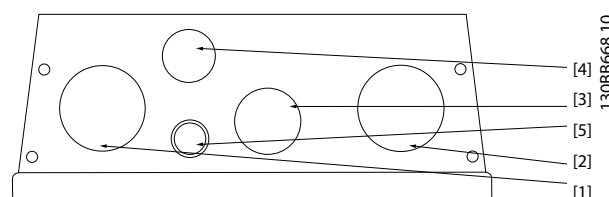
B1 - IP55 Threaded Gland Holes
